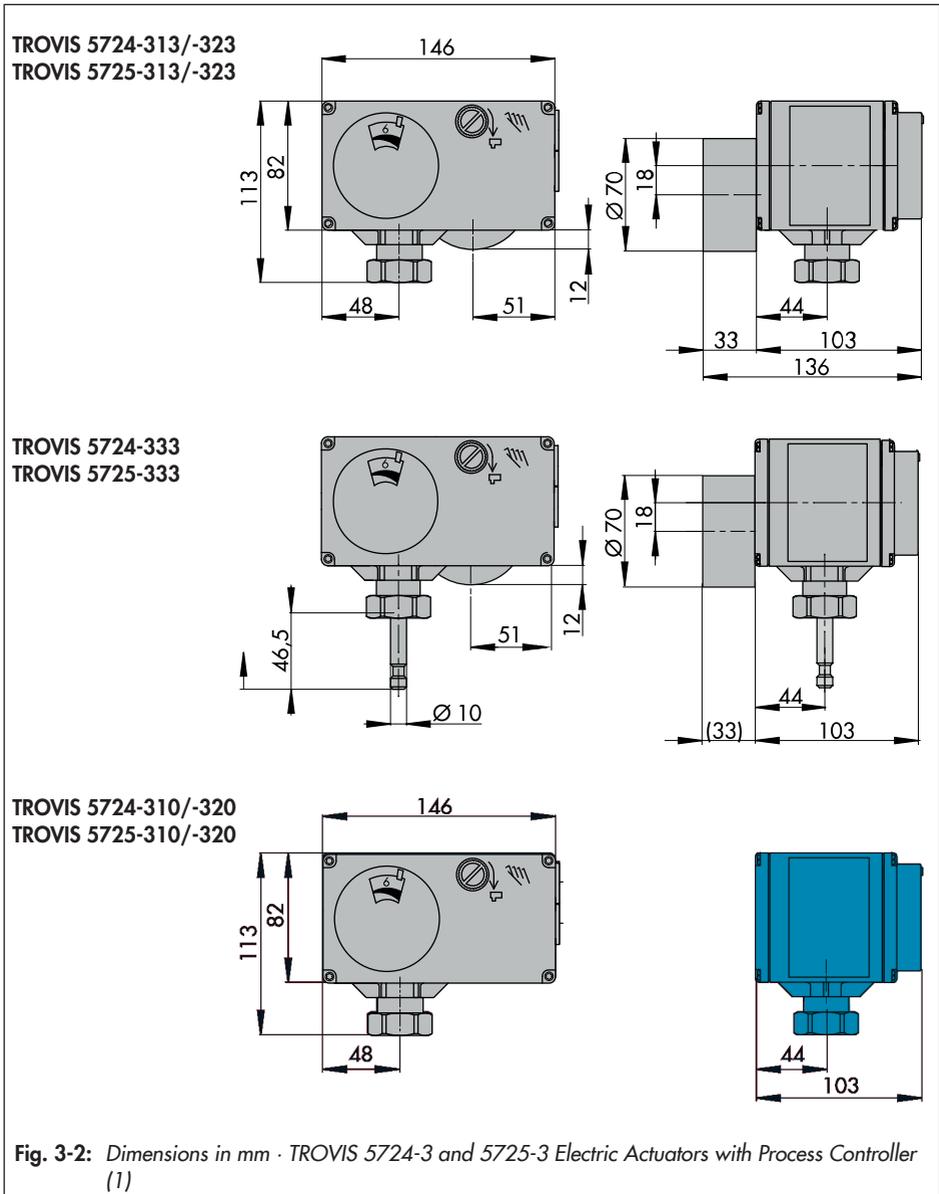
Dimensions in mm · TROVIS 5724-3 and 5725-3 Electric Actuators with Process Controller (1)
